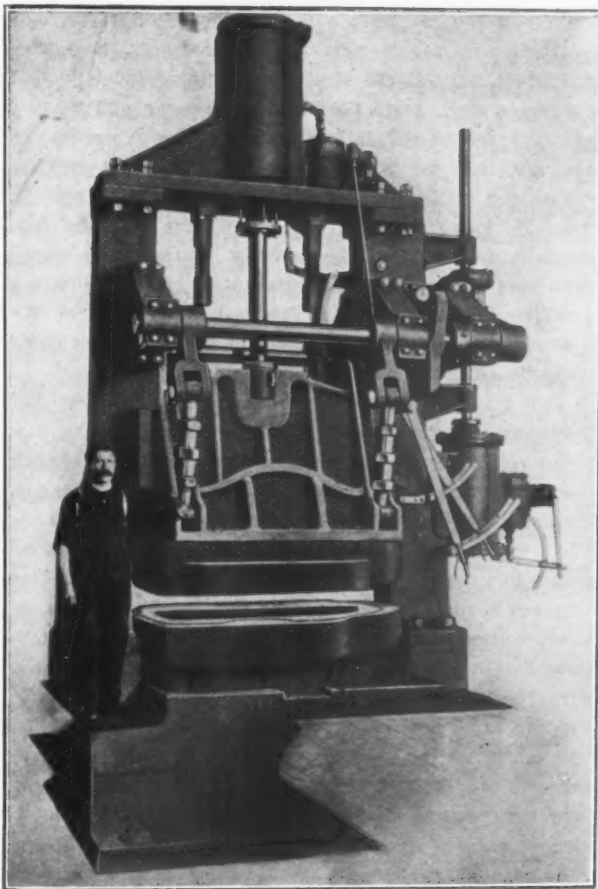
Steam Actuated Toggle Bathtub Stamping Hammer.
